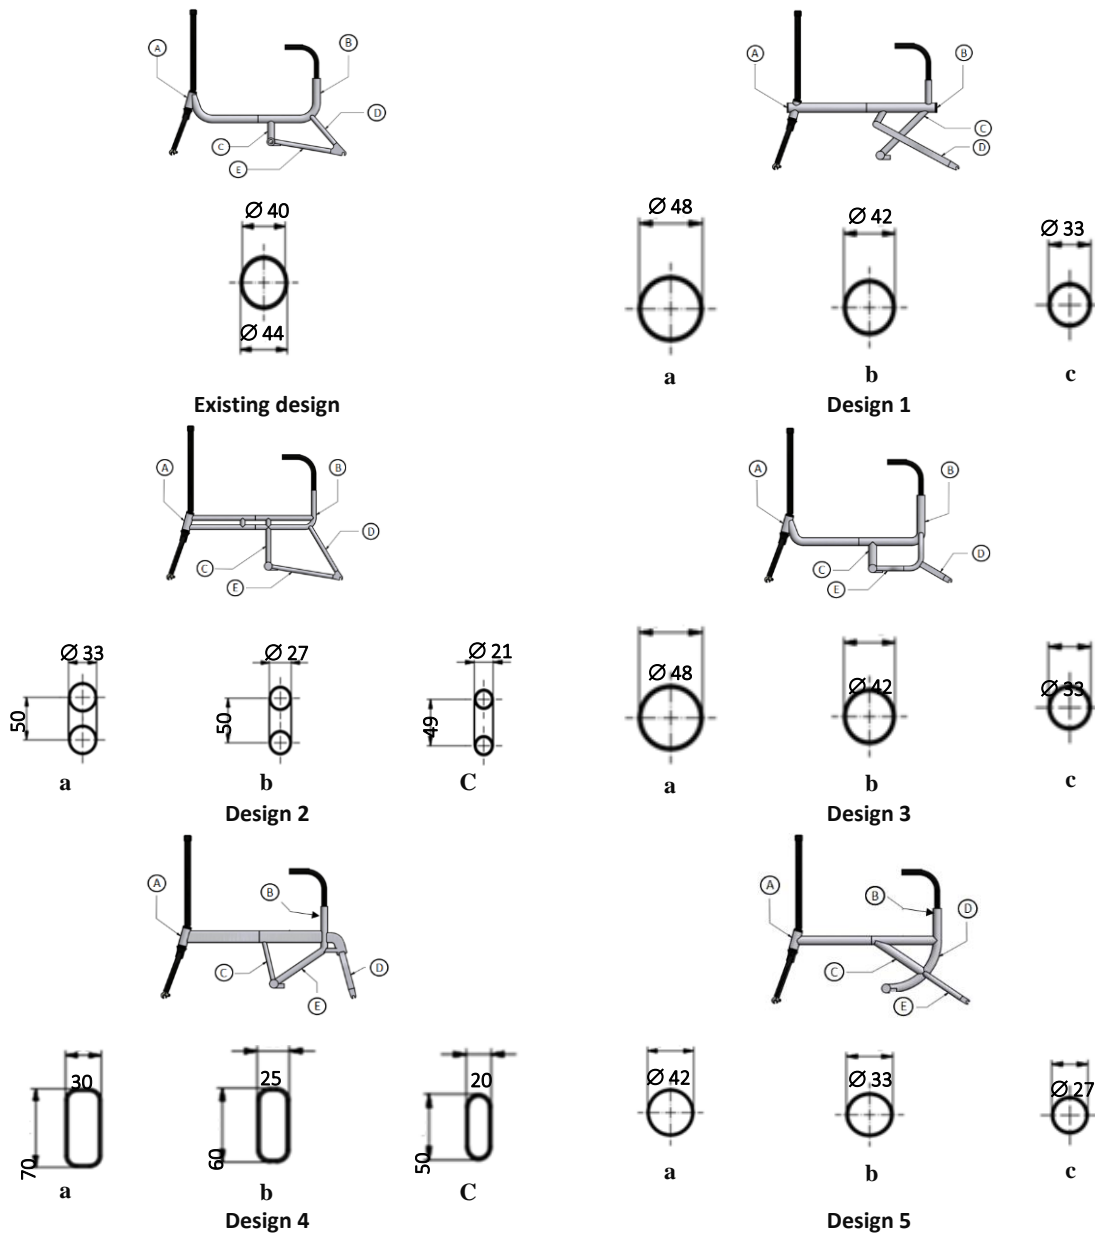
Existing PCB frame and five alternative designs along with their main cross-sectional dimensions (in mm).
